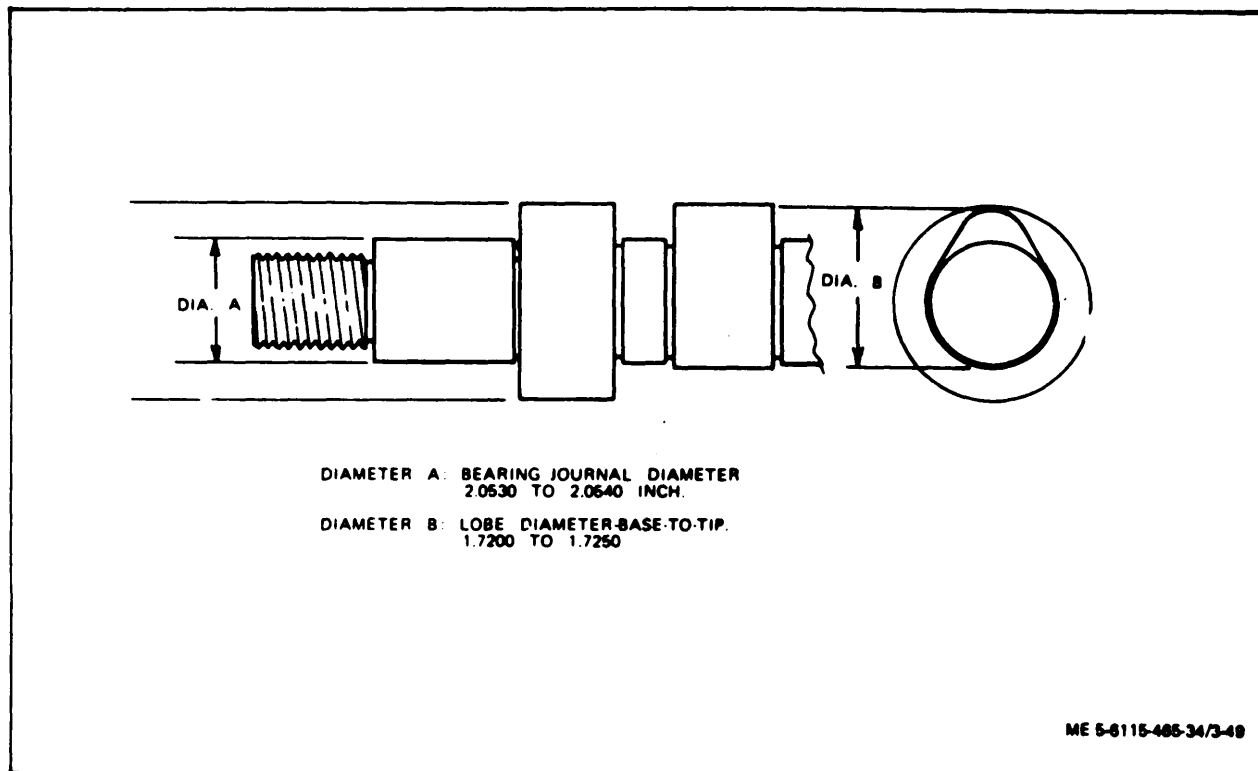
Dimensional Inspection of Camshaft
